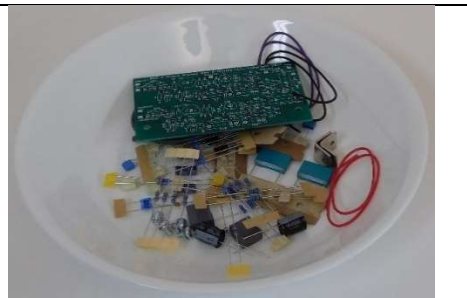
Component side of the PAT4RENEW PCB before loading (RevC Ver3)
